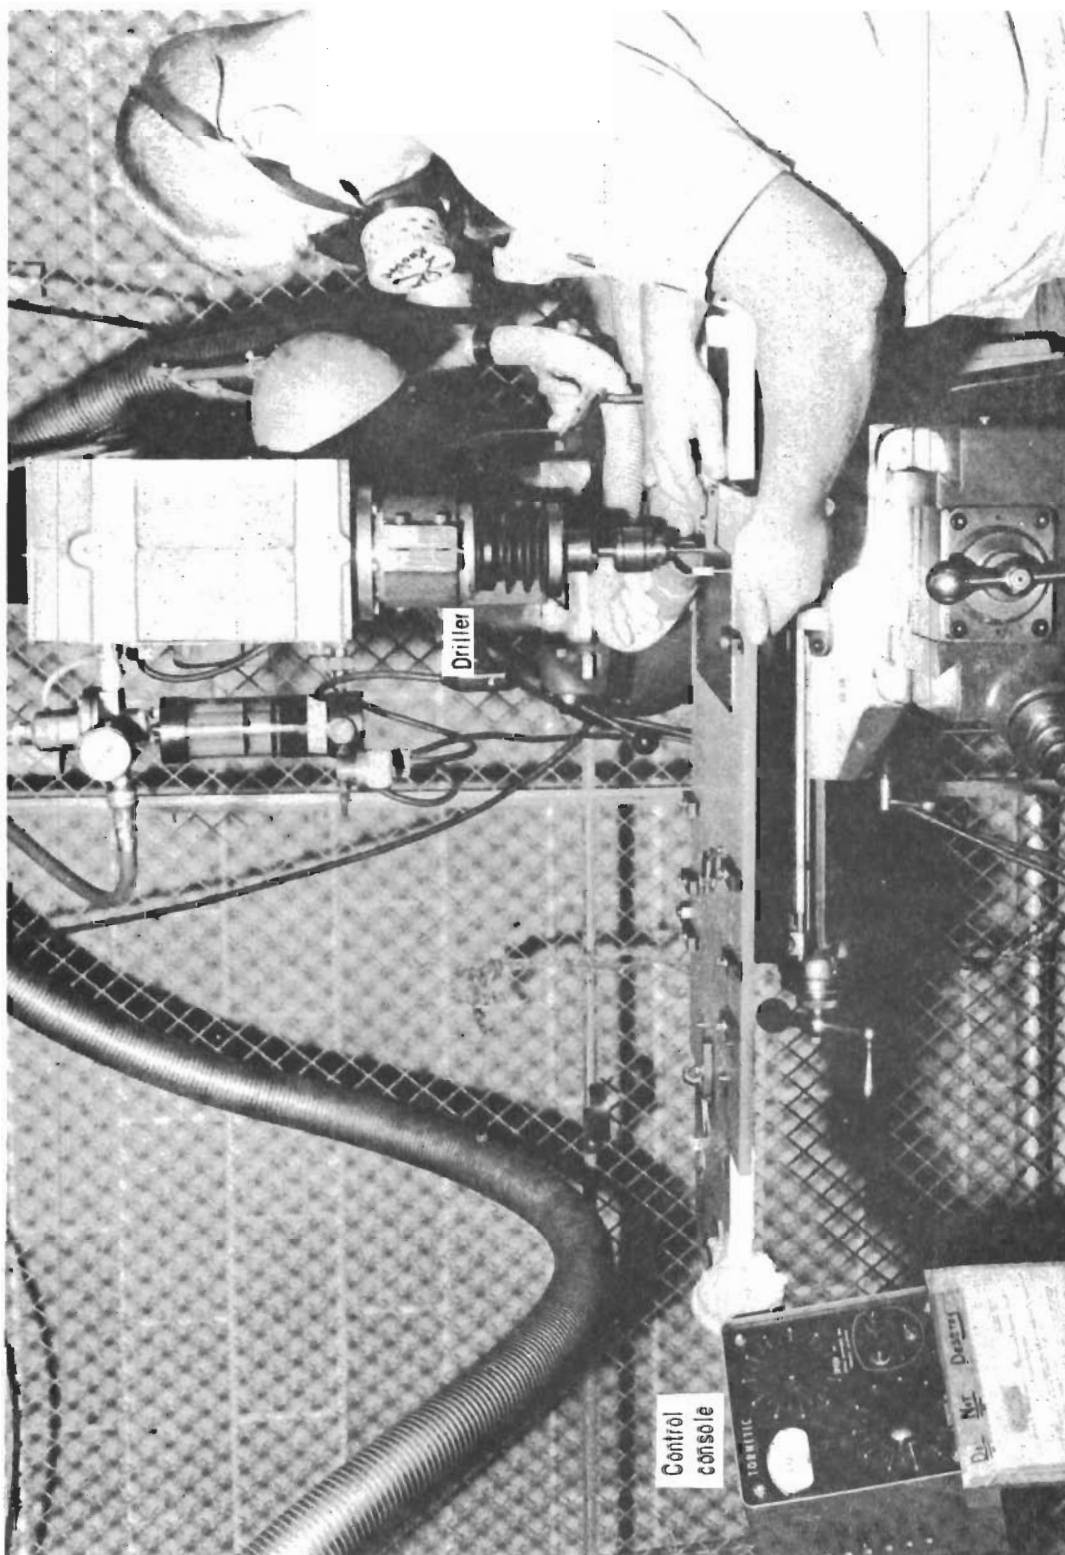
Torumatic Driller Used for Drilling Beryllium
